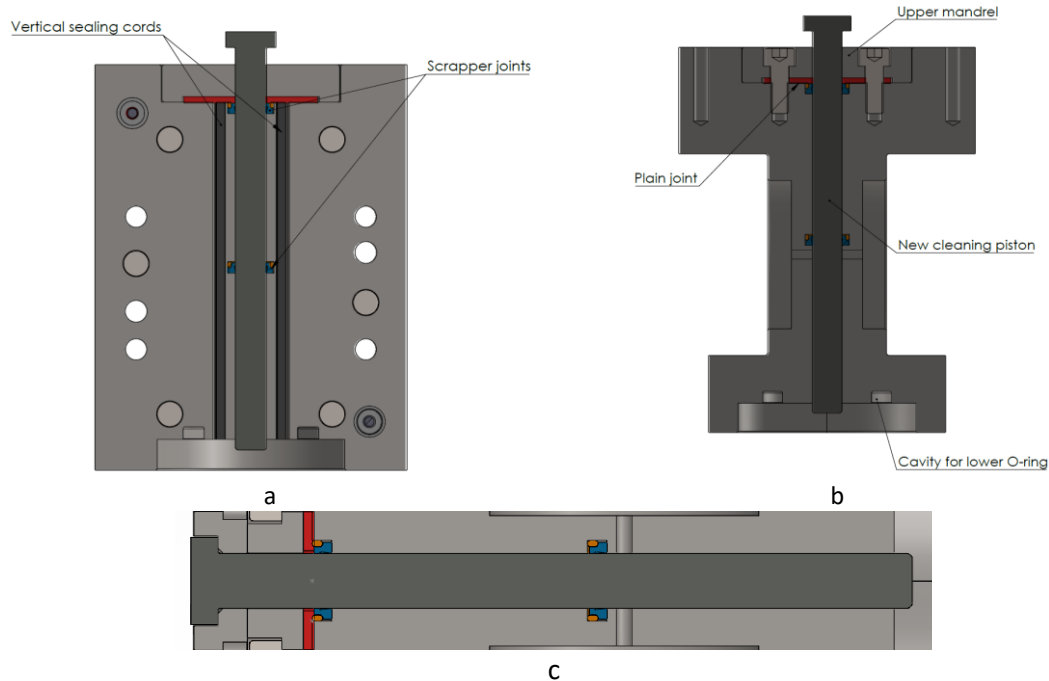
Detail of sealing mechanisms in the new body core. a) Contact surface between body core parts integrating the vertical silicone cords and detail of the upper mandrel with the plane joint. b) Detail of threaded connection of the upper mandrel. c) Scrapper joints (dynamic O-rings, blue) and the new cleaning piston
